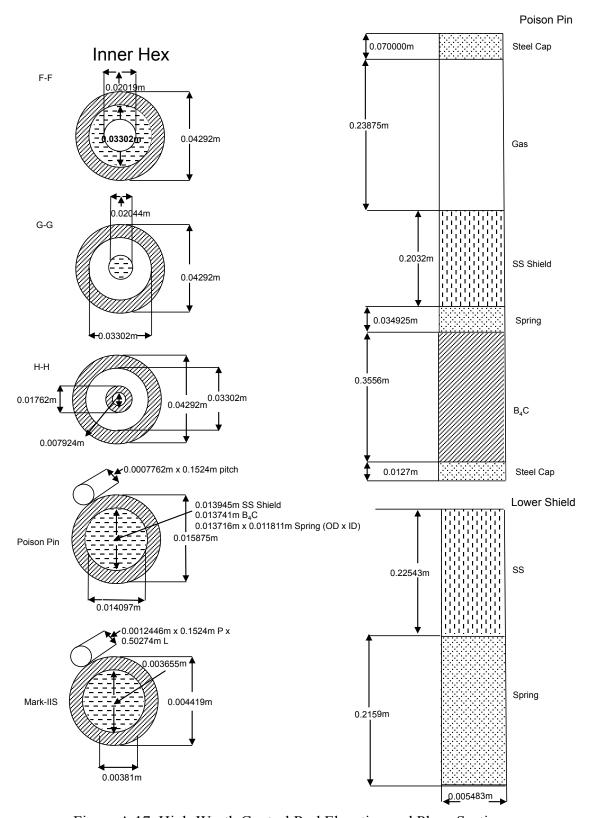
High-Worth Control Rod Elevation and Plane Sections
